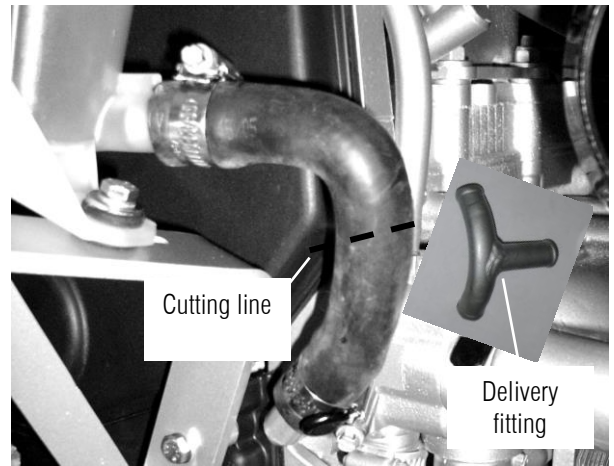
Sleeve to be cut to connect the boiler kit return connection on 1.9 and 2.4 HPE base engines.
